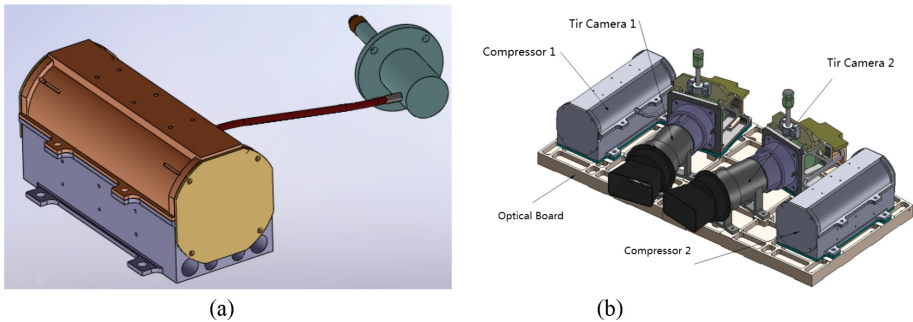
(a) Pneumatically driven Stirling cryocooler. (b) Layout of TIR imaging module
